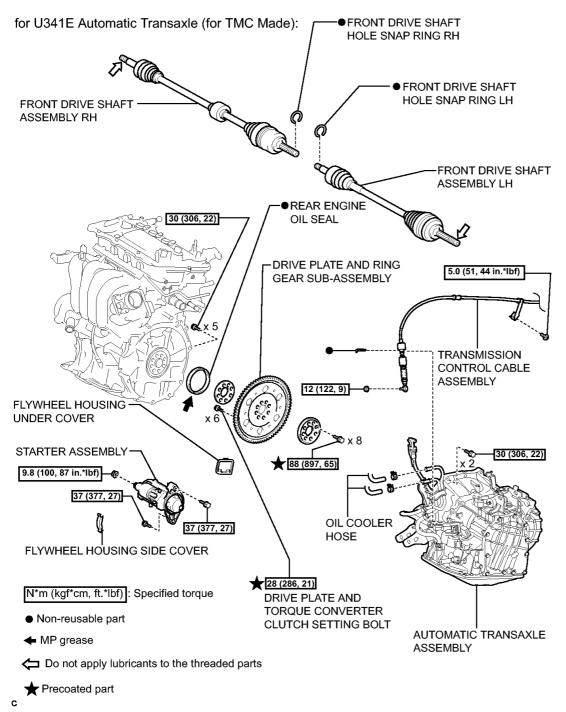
Identifying Rear Crankshaft Oil Seal Replacement Components With Torque Specifications
